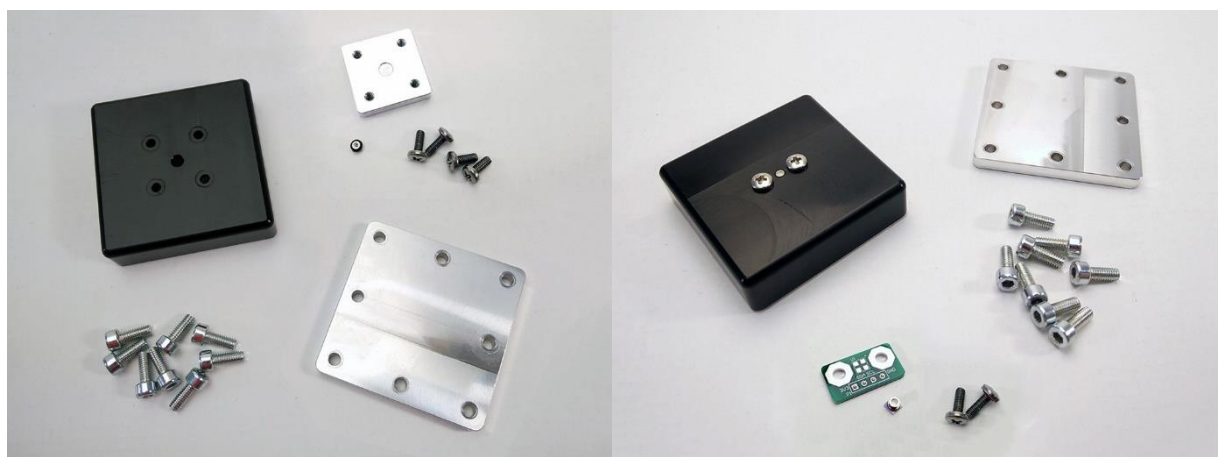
A special enclosure was made to test the sealing of the pressure sensor. On the first tests the pressure sensor was attached using an aluminium plate (left). A custom PCB was then designed that is also used to attach and connect the pressure sensor in the actual PitStop Tags (right).
